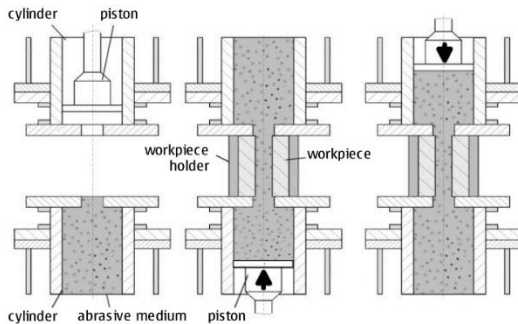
Abrasive media is pushed through the workpiece with a piston, gradually polishing the workpiece until desired finish is achieved (Uhlmann, Schmiedel, & Wendler, 2015).
